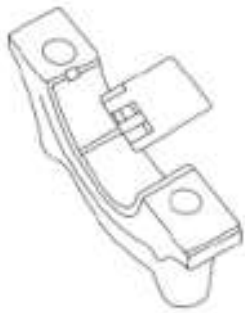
Positioning Piece Of Plastigage Across Bearing Surface
